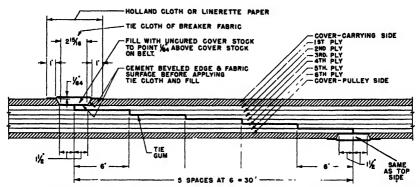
Section through center line of a rubber-fabric belt before the splice is vulcanized.
